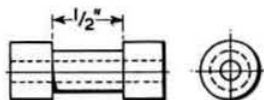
Two rollers of this type are required to guide the paper on the Morse recorder.
